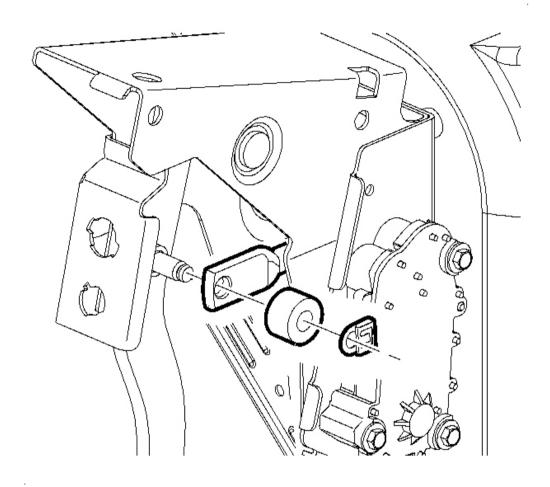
Removing/Installing Washer & Retaining Clip To Brake Pedal Courtesy of GENERAL MOTORS CORP.
